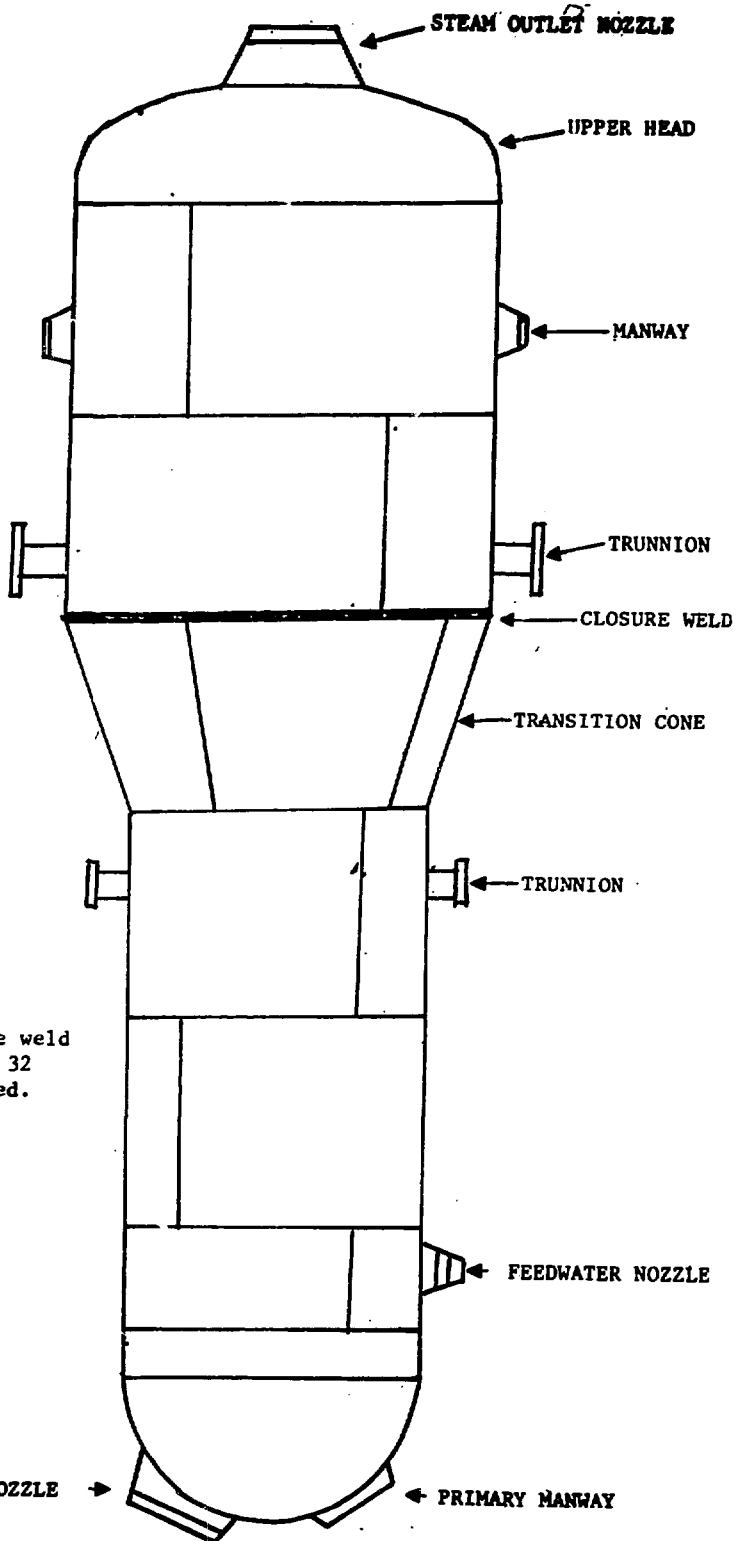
Schematic depicting the closure weld of Steam Generator # 32 where the leak occurred.
